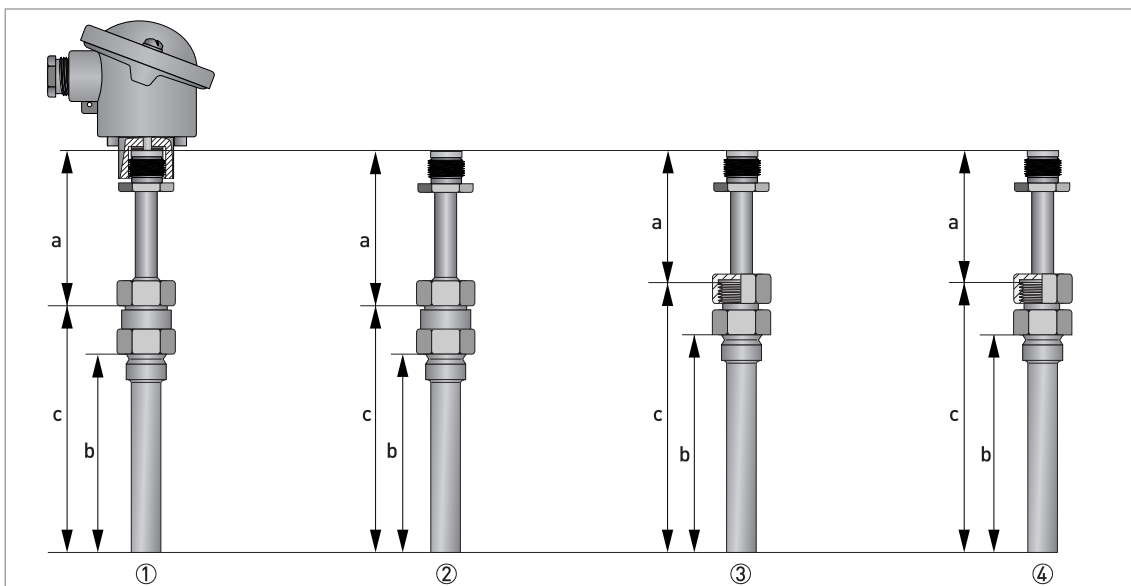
Threaded thermometer with thermowell according to DIN 43772
